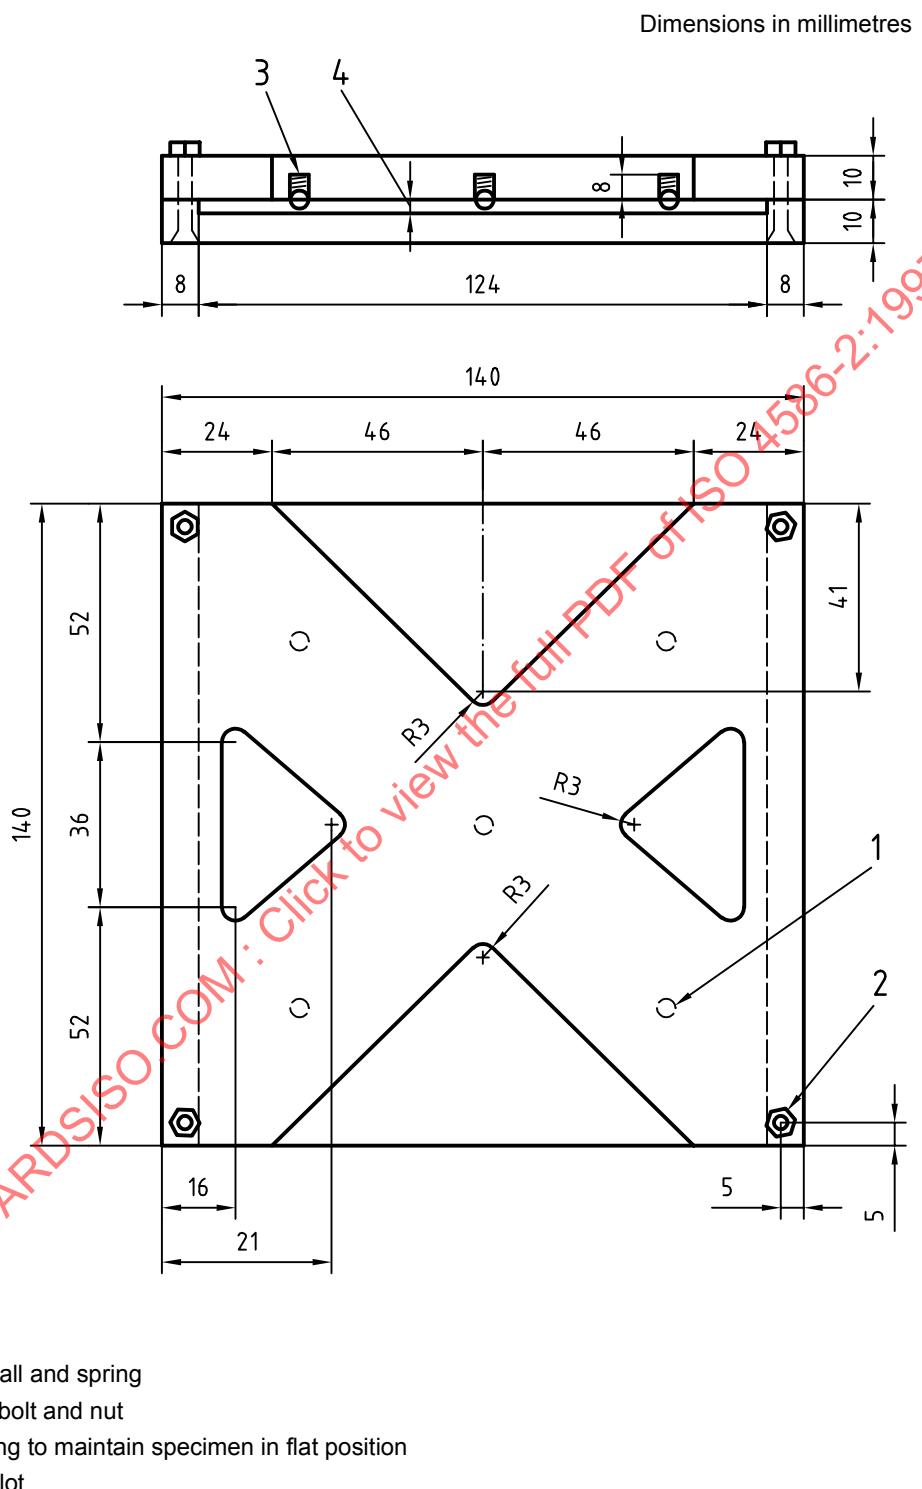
Fixture to maintain the test specimen in position (see 9.2.5 and 10.2.5)
